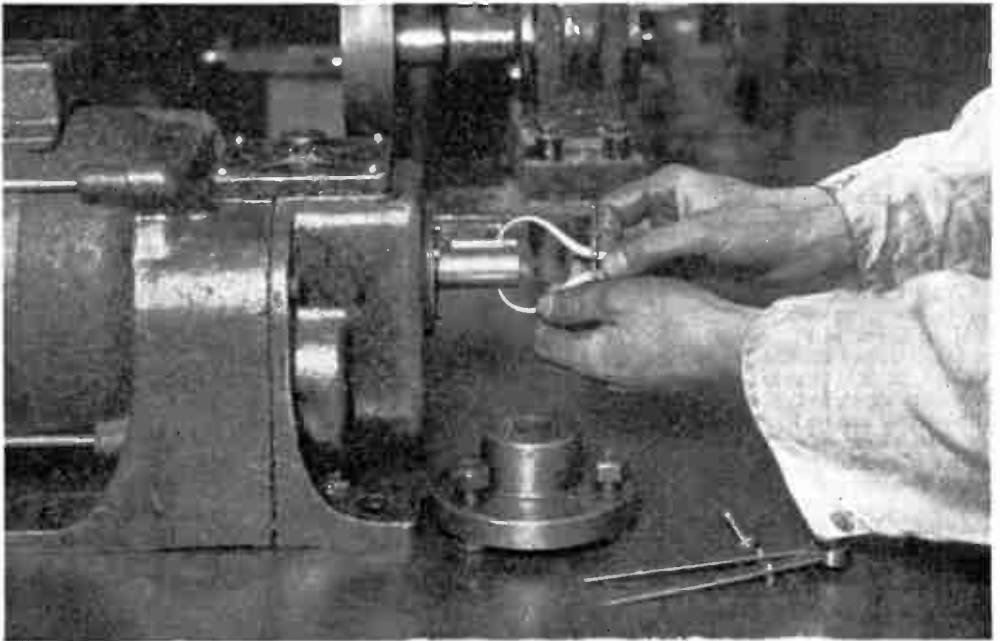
D.—FITTING A COUPLING TO A GEARED MOTOR SHAFT.
